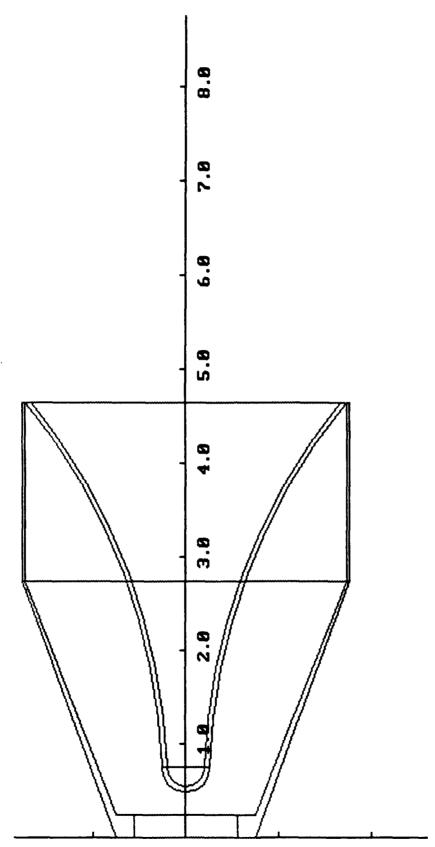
90mm Warhead Section Assembly (Liner, Explosive, and Case) (weight = 2 lb)
